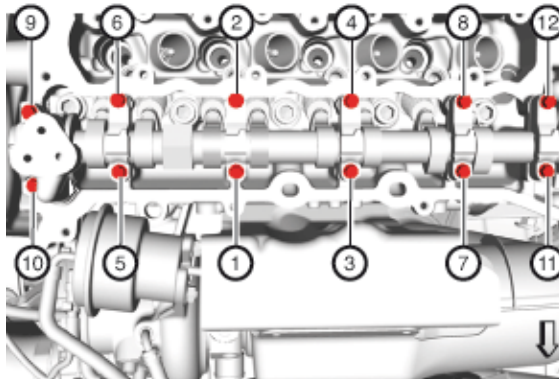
Exhaust Camshaft Bearing Cap Bolt Tightening Sequence
